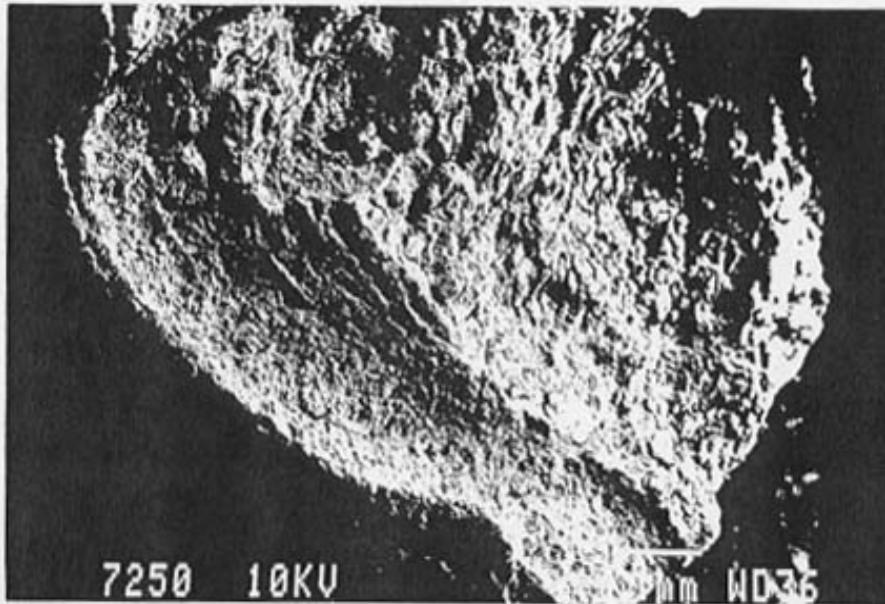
Inner starboard A3 hinge lug plate secondary crack, overview
